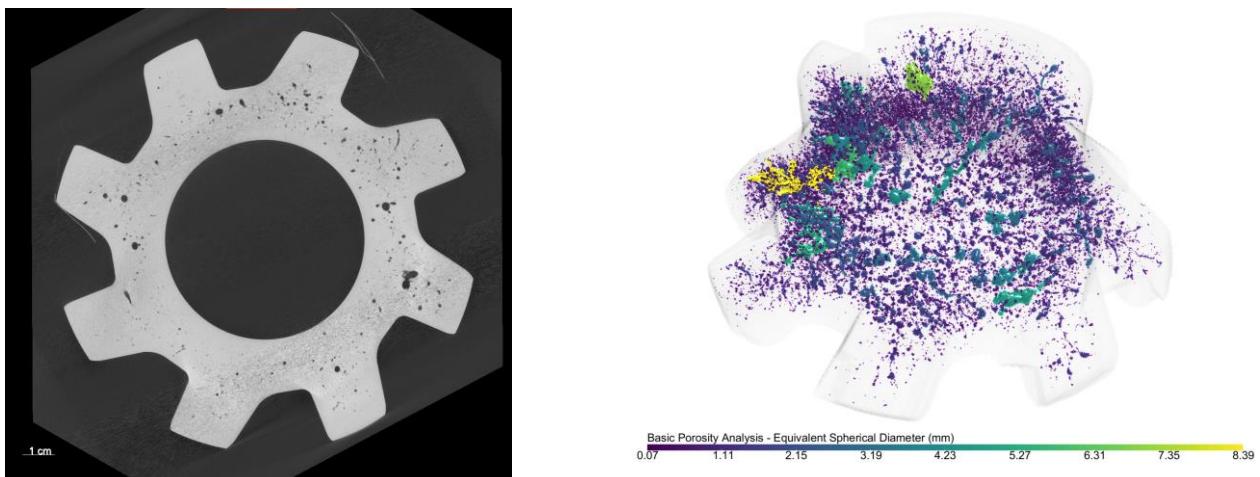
Typical cross sectional view of a casting – pore spaces in black (left), typical 3D view of porosity color coded by size after segmentation using Otsu thresholding (right)
